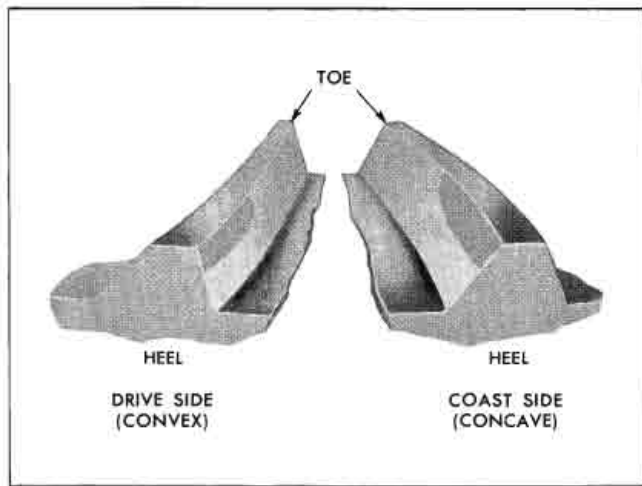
Tooth Pattern When Backlash is Excessive
